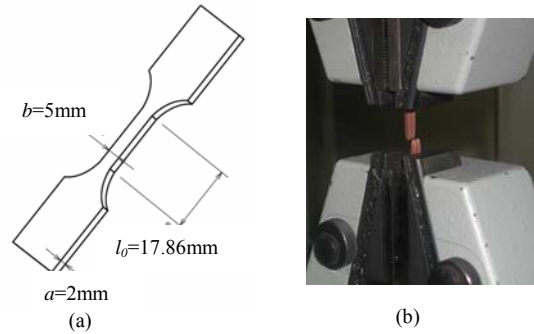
Tensile testing (a) dimensions of the standard specimen and (b) fractured specimen after tensile test.
